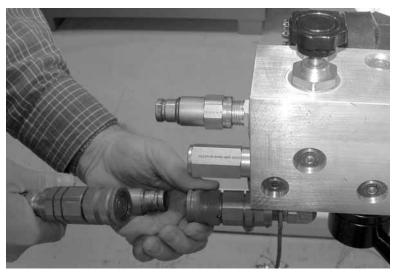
Disconnect hydraulic power by removing the hydraulic hoses from the fittings on the manifold.
